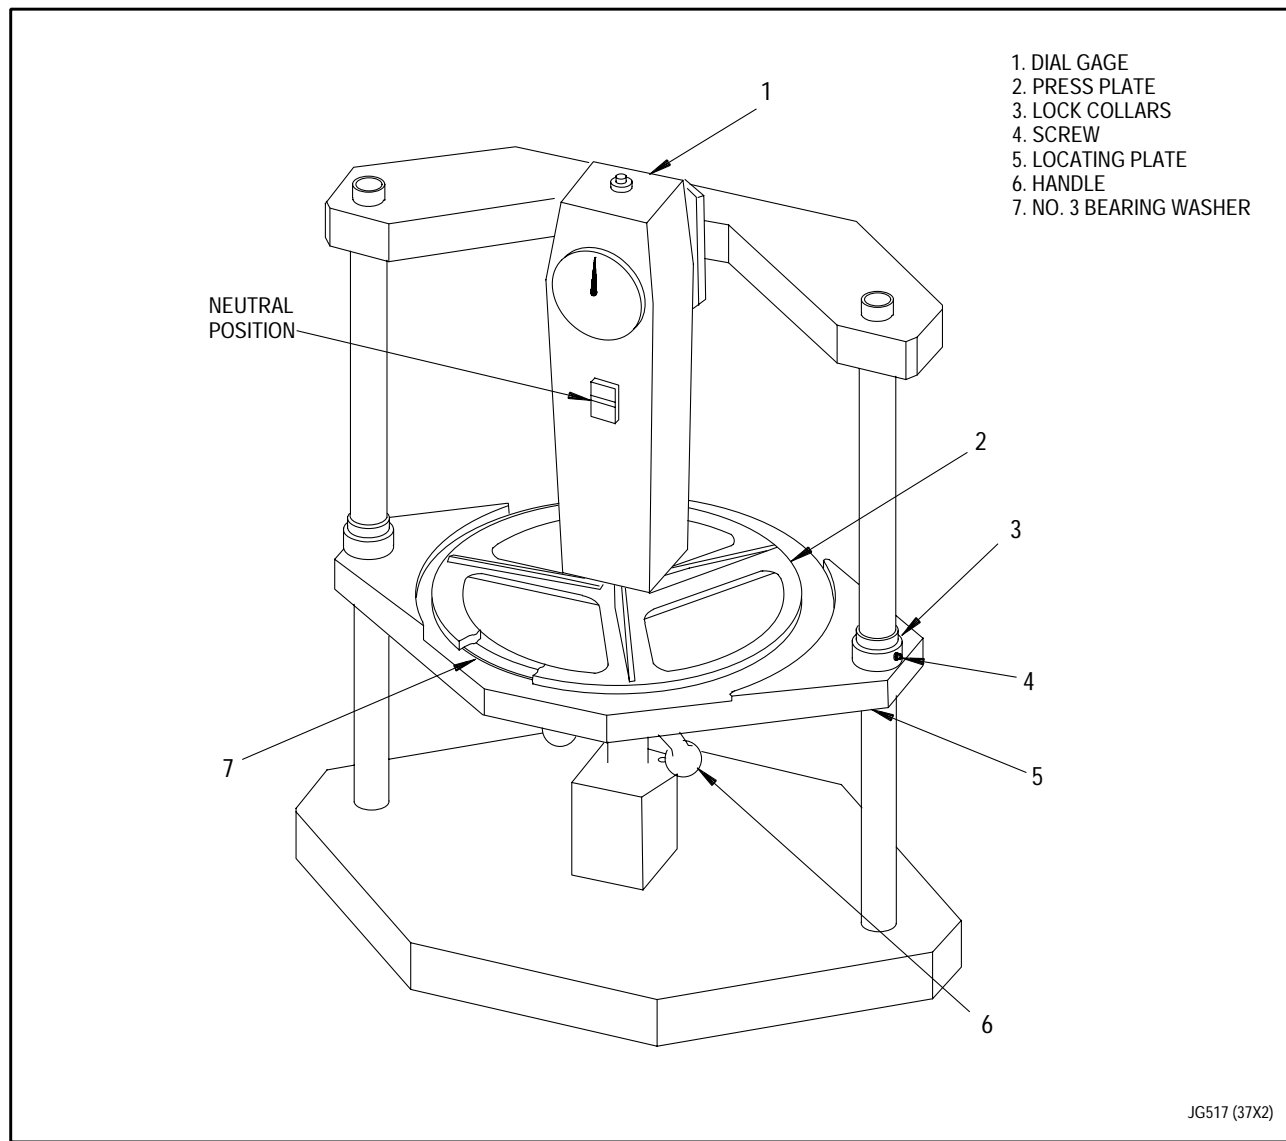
No. 3 Bearing Rear Seal Assembly Washer - Inspection (Sheet 2 of 2)
